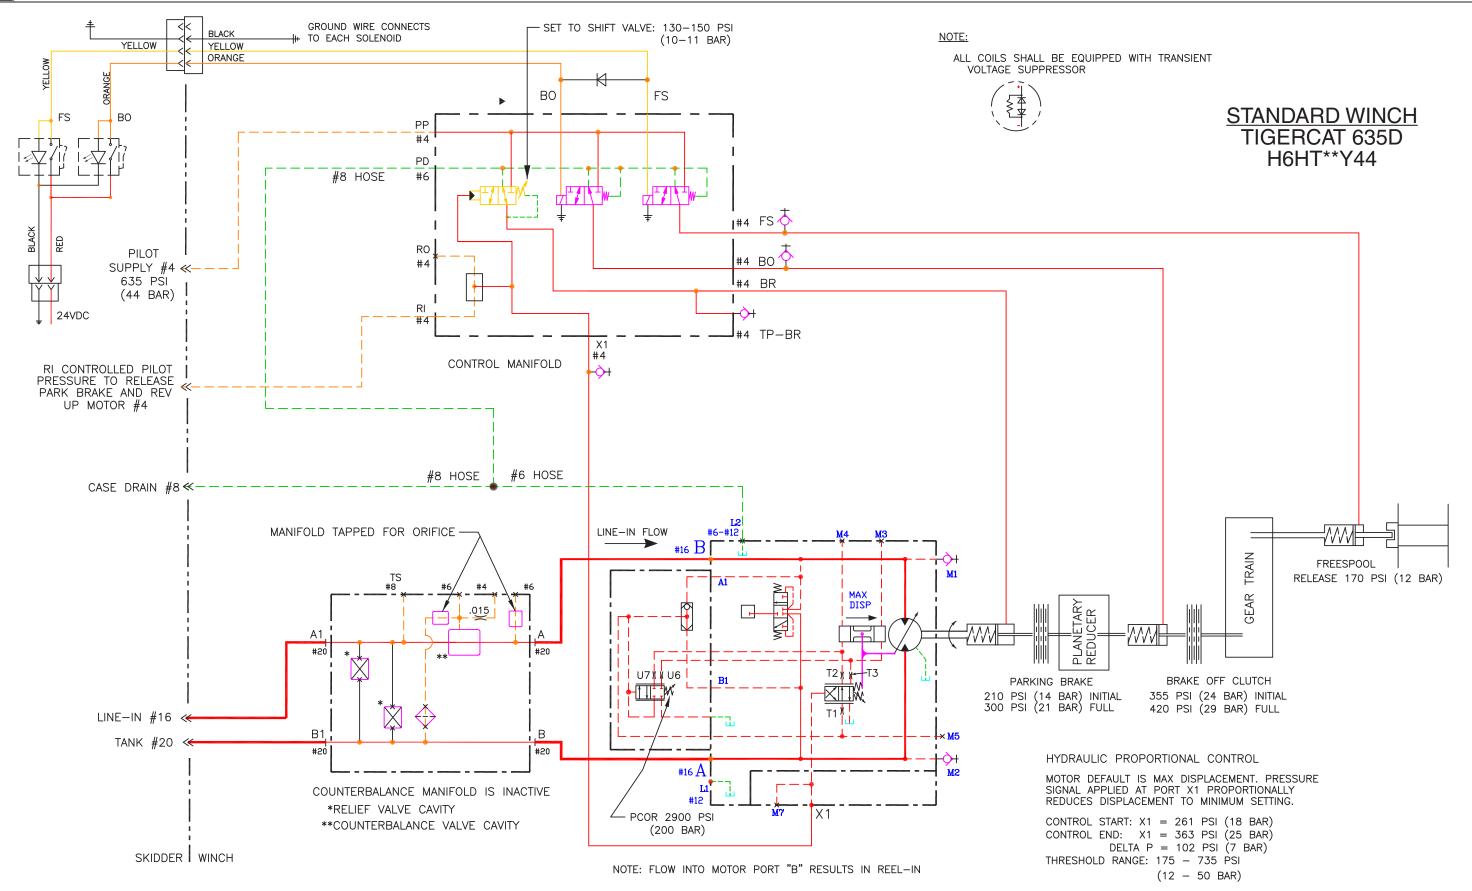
Hydraulic/Electrical Schematic (Rev. P), H6HT (Standard) Winch
